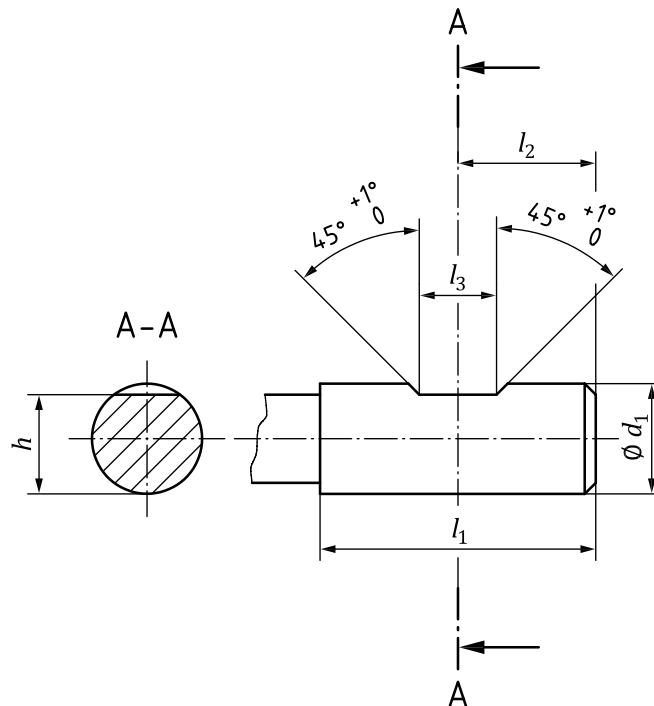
WE Form — Flatted cylindrical shanks with single flat
